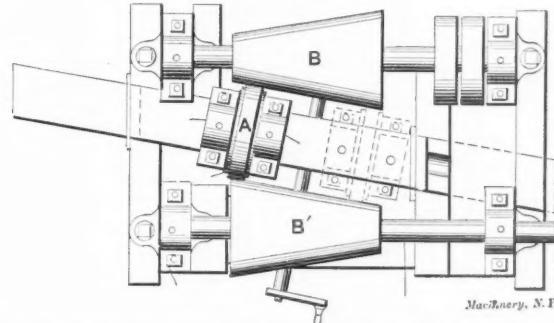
Patent No. 148,066, granted to J. D. Husbands, Jr., 1874, for Improvement in Gearing of Stone Sawing Machines.
